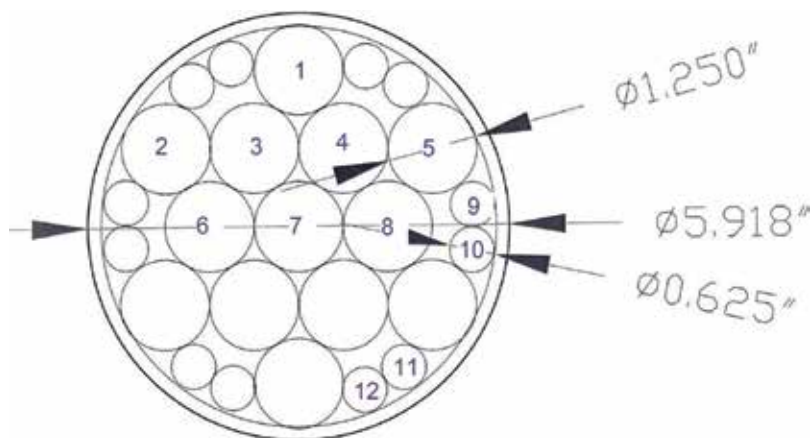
Cross section, hose bundle for minimum outfitted. BOP stack. Hose # 1: annular preventer close; Hose # 2: annular preventer open; Hose # 3: upper pipe ram close; Hose # 4: upper pipe ram open; Hose # 5: shear/blind ram close; Hose # 6: shear/blind ram open; Hose # 7: lower pipe ram close; Hose # 8: lower pipe ram open; Hose # 9: choke HCR close; Hose # 10: choke HCR open; Hose # 11: kill HCR close; Hose # 12: kill HCR open.
